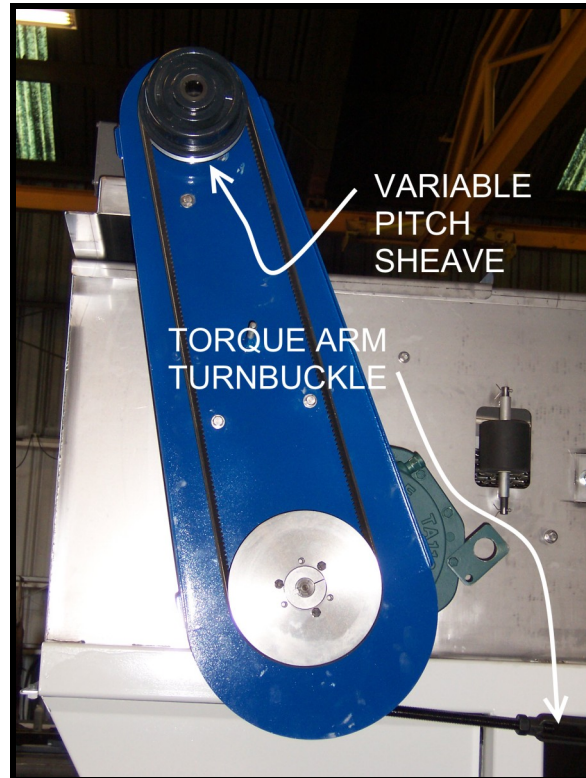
V-BELT DRIVE (SHOWN WITH GUARD REMOVED FOR CLARITY)
